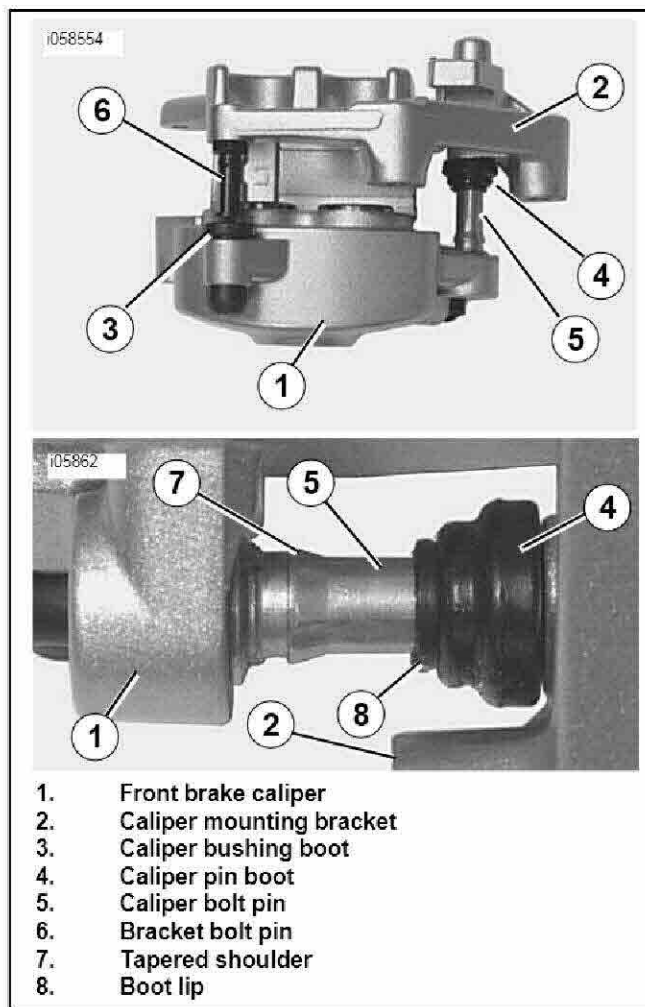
Assembling Front Brake Caliper and Mounting Bracket
